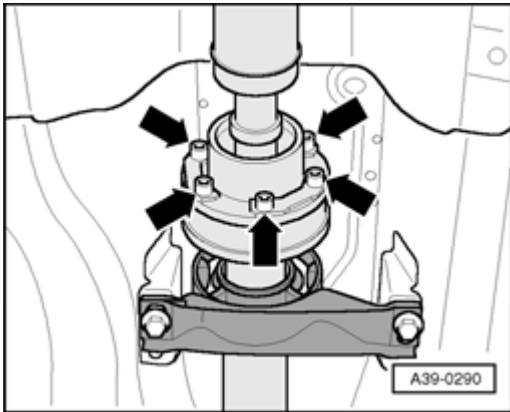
Identifying Front Drive Shaft Tube To Rear Drive Shaft Tube Bolts
